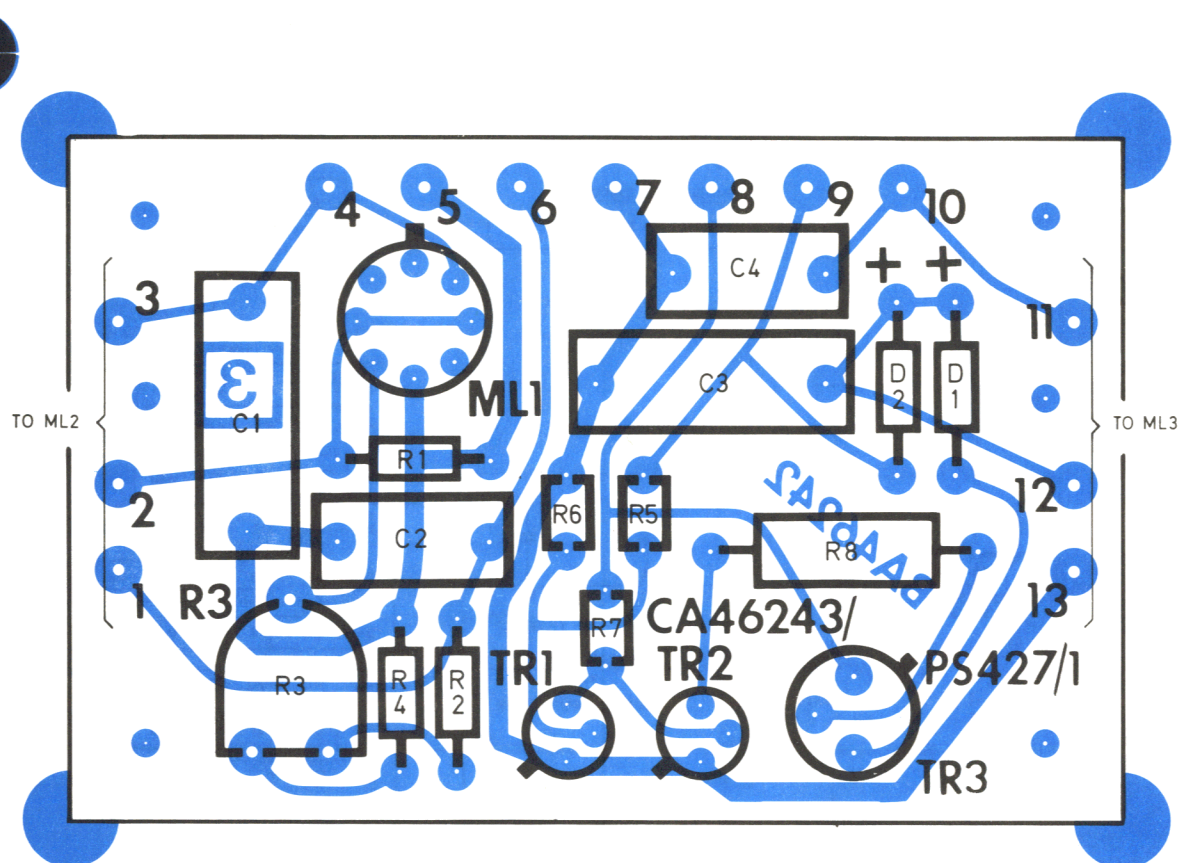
A.F. and memory regulator board PS427/1 : component layout
